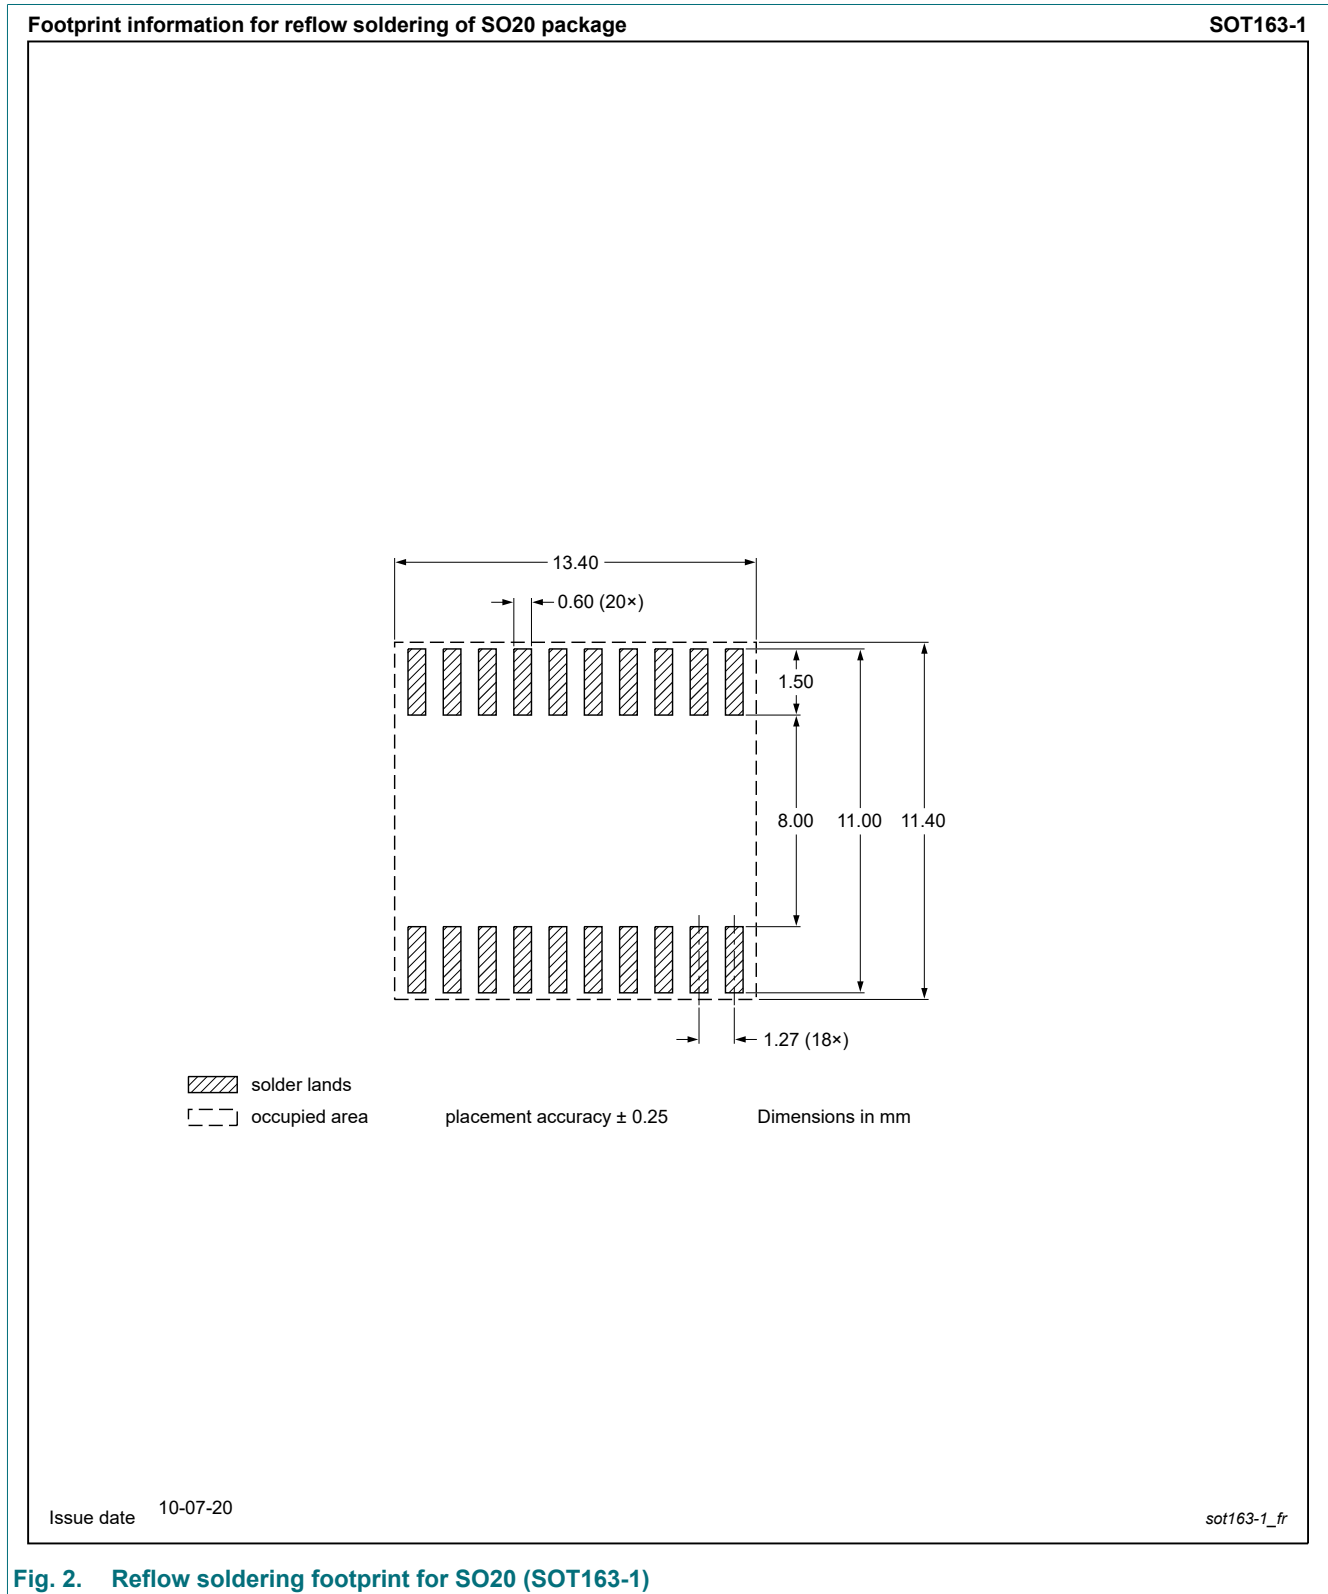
Reflow soldering footprint for SO20 (SOT163-1)
